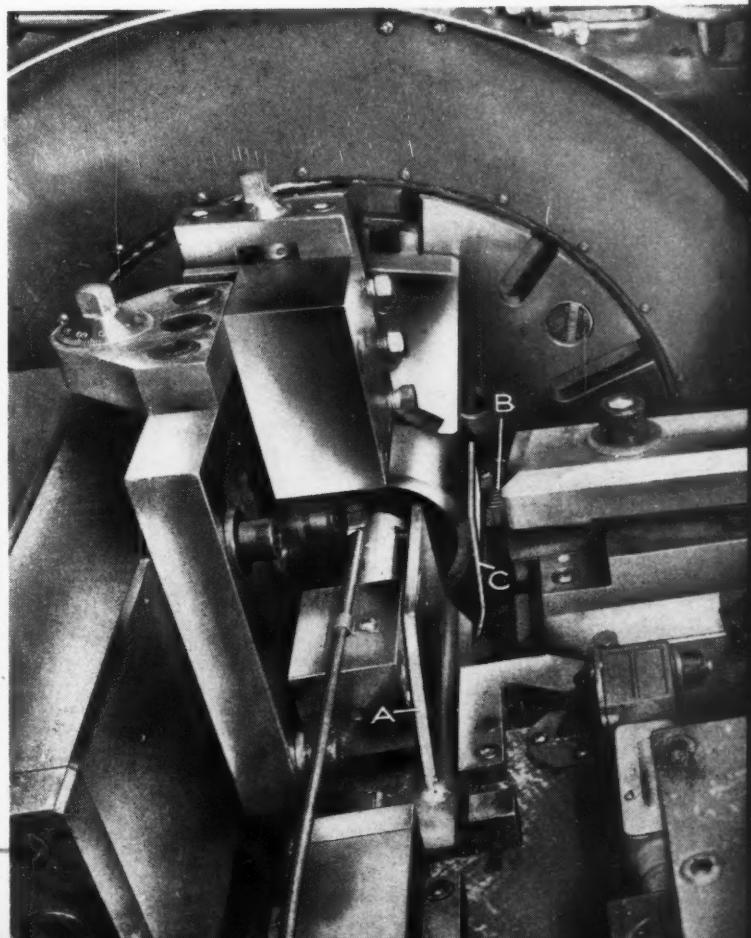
The Gisholt lathe shown in Fig. 3 utilizes a gang set-up of carbide tools (B) which engage the work through a stripper plate (C). The casting is automatically positioned by a stop (A)
